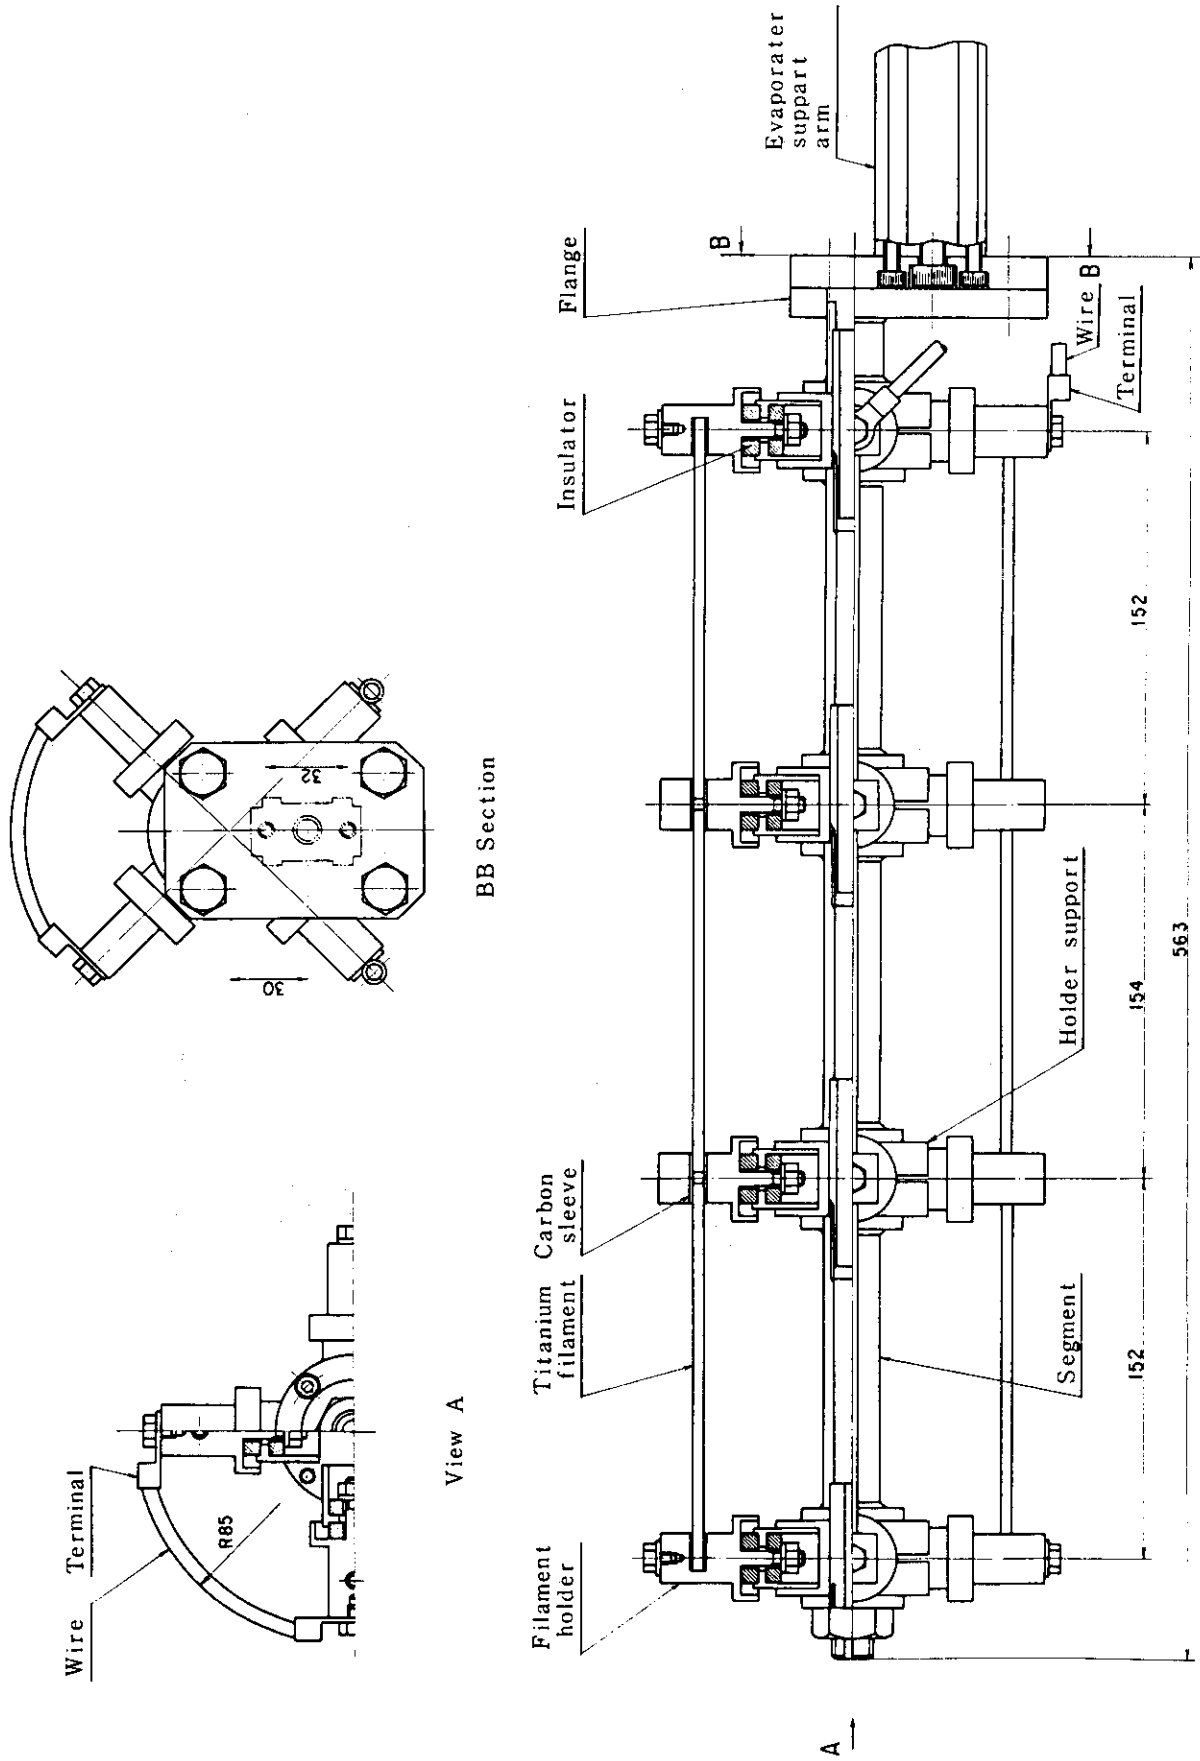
Detailed design of the titanium evaporator, which is composed of three segments.
